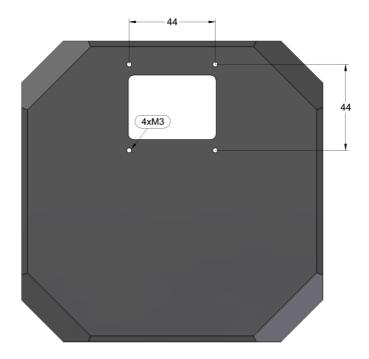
M3 threaded holes, used to mount the EFW, on the C3 camera head
